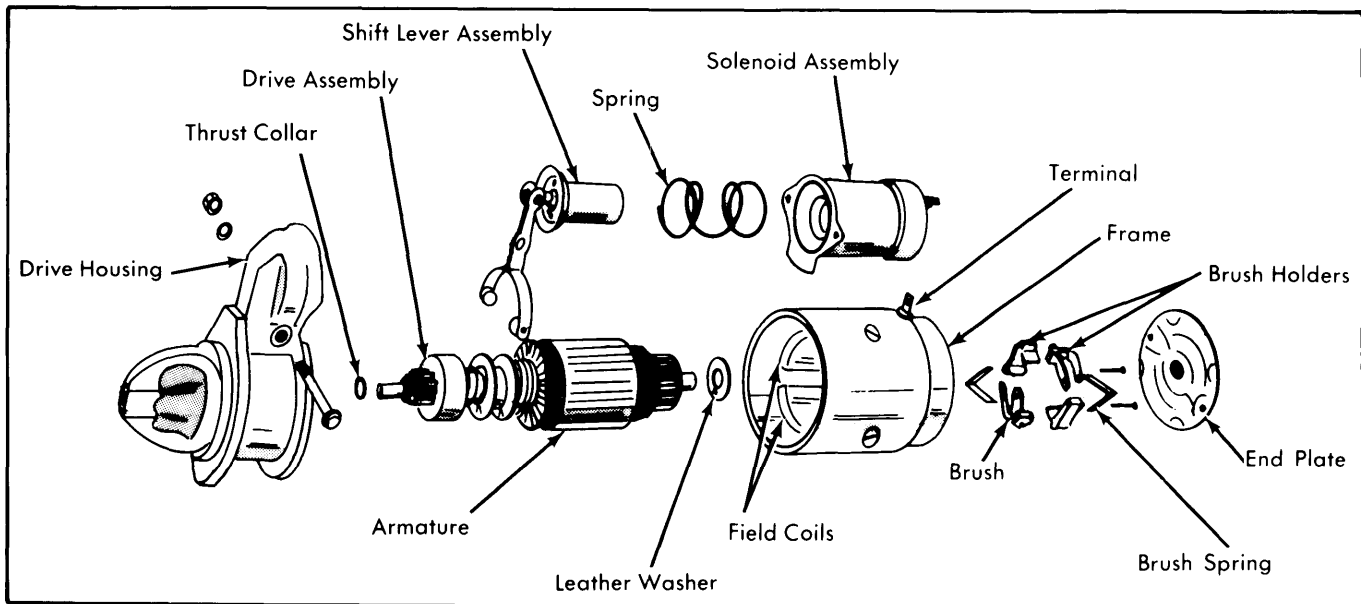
Exploded View of Delco-Remy Enclosed Housing Starter Assembly (Diesel Similar)
